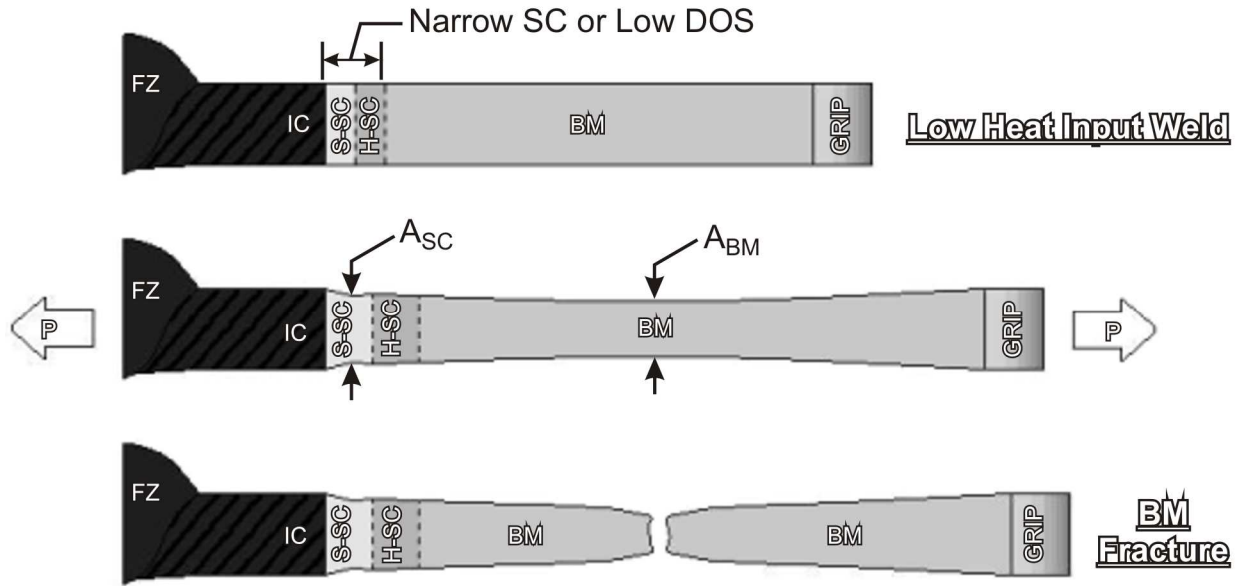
An illustration of base-metal fracture that occurred during uniaxial transverse weld tensile testing of Cr-Mo DP600 steel. Top image: A low heat input weld cross-section, which depicts a narrow HAZ with low DOS. Middle image: The weld in tension at maximum diffuse necking prior to strain localization. Bottom image: the resulting BM fracture location.
